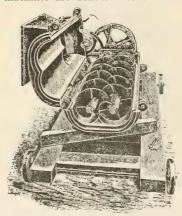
Double-spiral, rapidly rotating peat machine, with continuous screw-threads, for bituminous peat.
